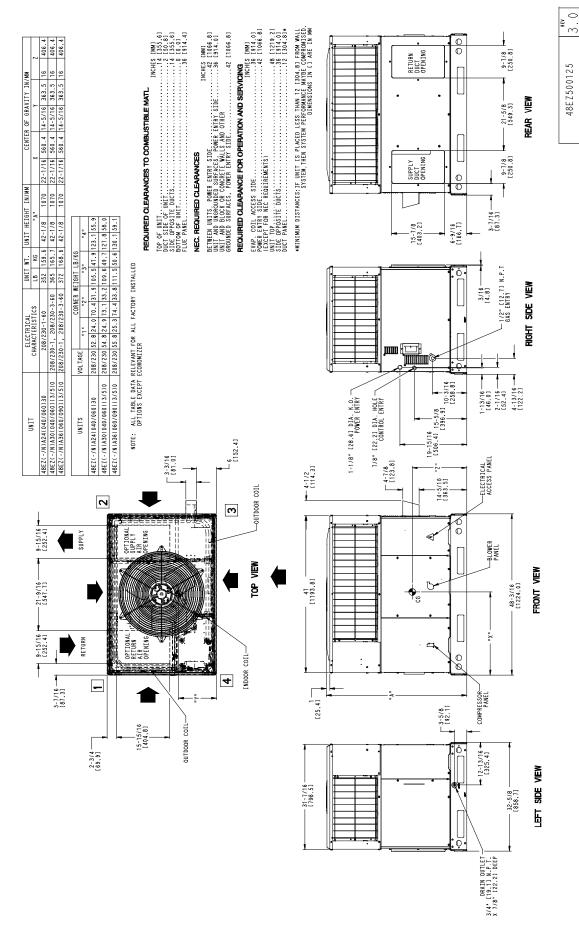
48EZ-A24-36 Unit Dimensions
